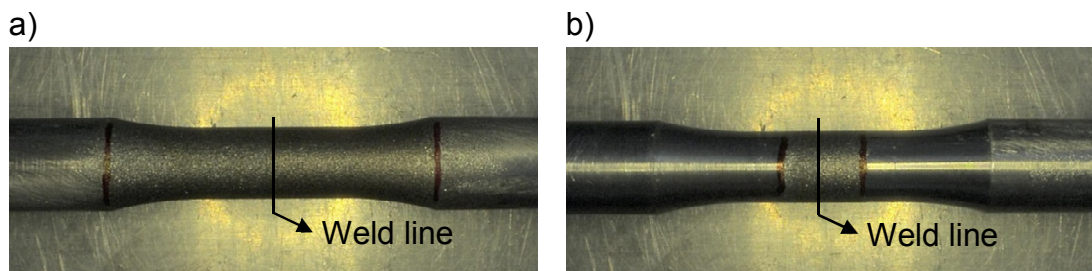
The peened region between the two-brown lines for the welded joints a) SP for whole specimen and b) SP for weld zone.
